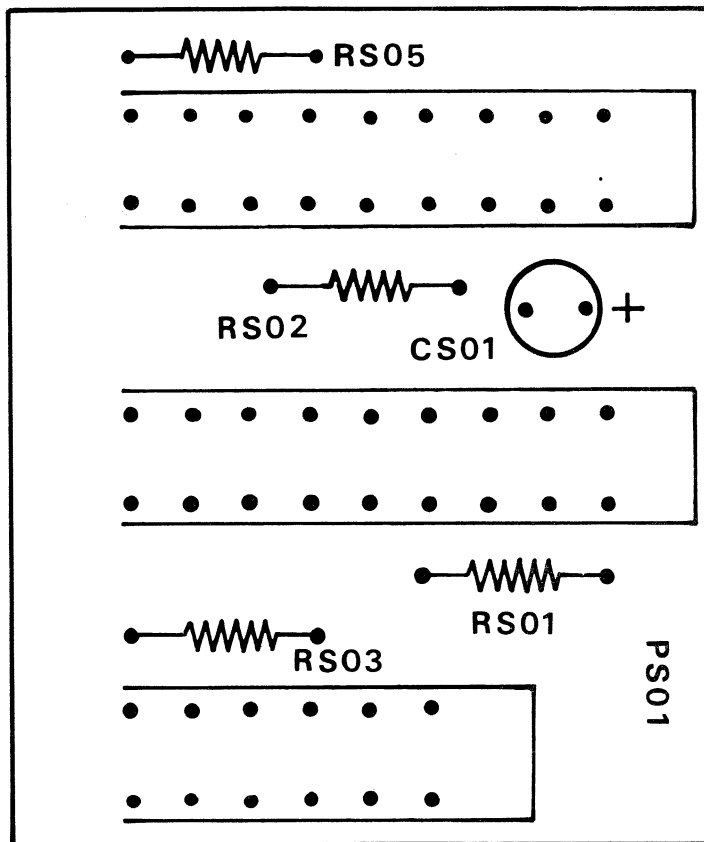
Selector Push Switch Assembly PS01 Component Locations
